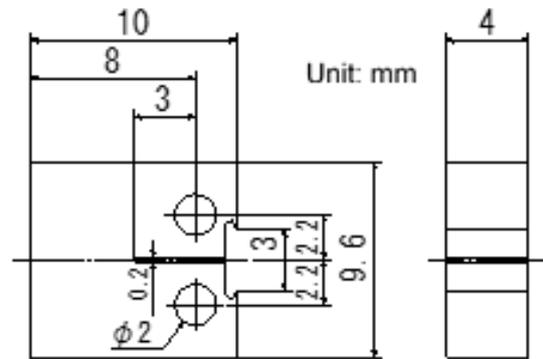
Geometry and dimensions of Mini-C(T) specimen.
